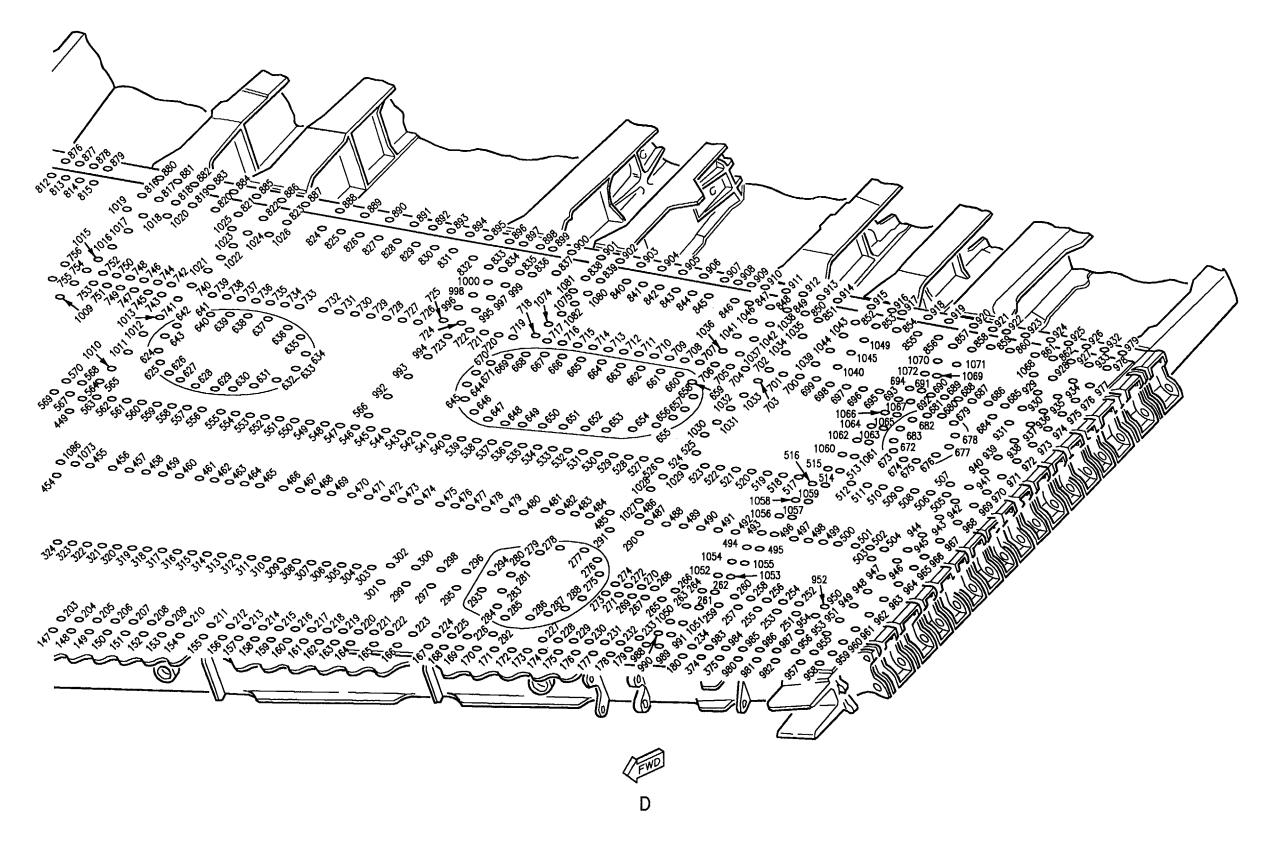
Inner Wing Skins Hole Numbers (Sheet 3)
